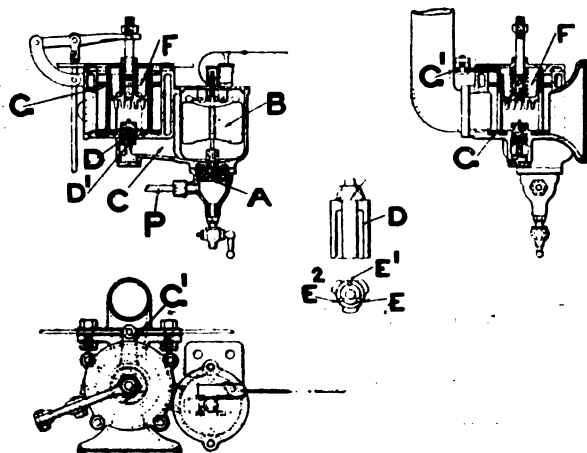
Sectional Elevations and Plan of the Bental "unchokable" Carburettor.
